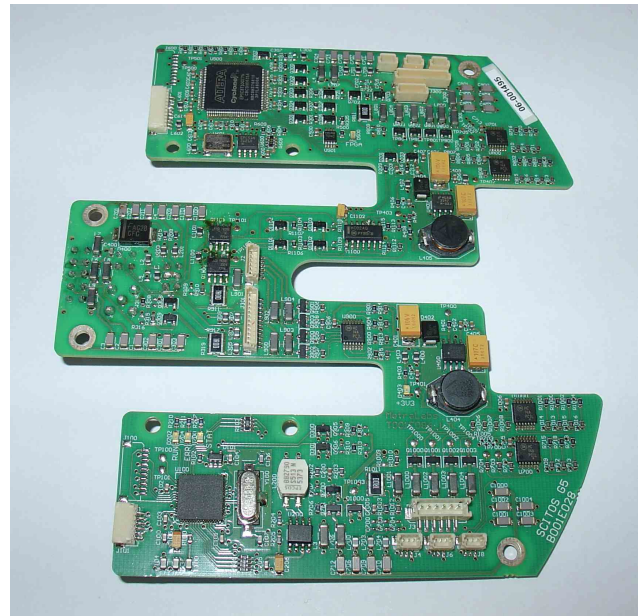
PCB of the *RobotHead* module, mounted at the neck position of the robot head
